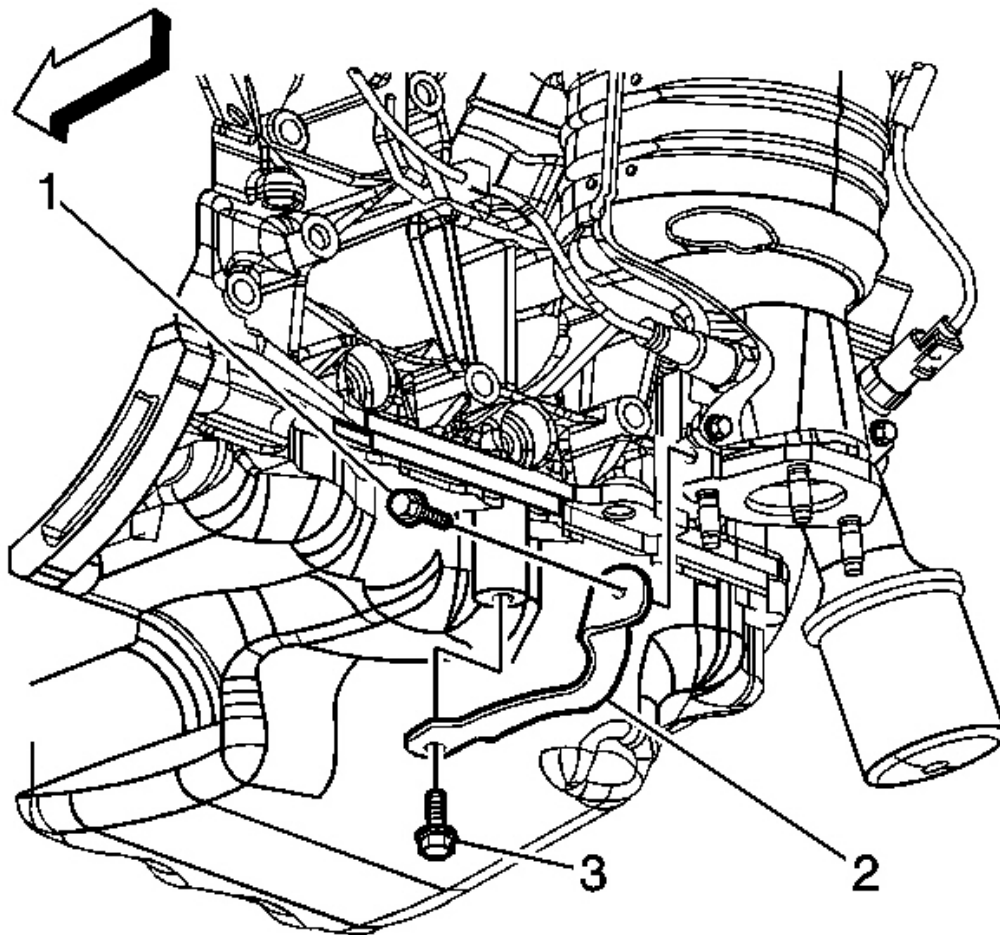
View Of Exhaust Manifold Pipe (L66)
